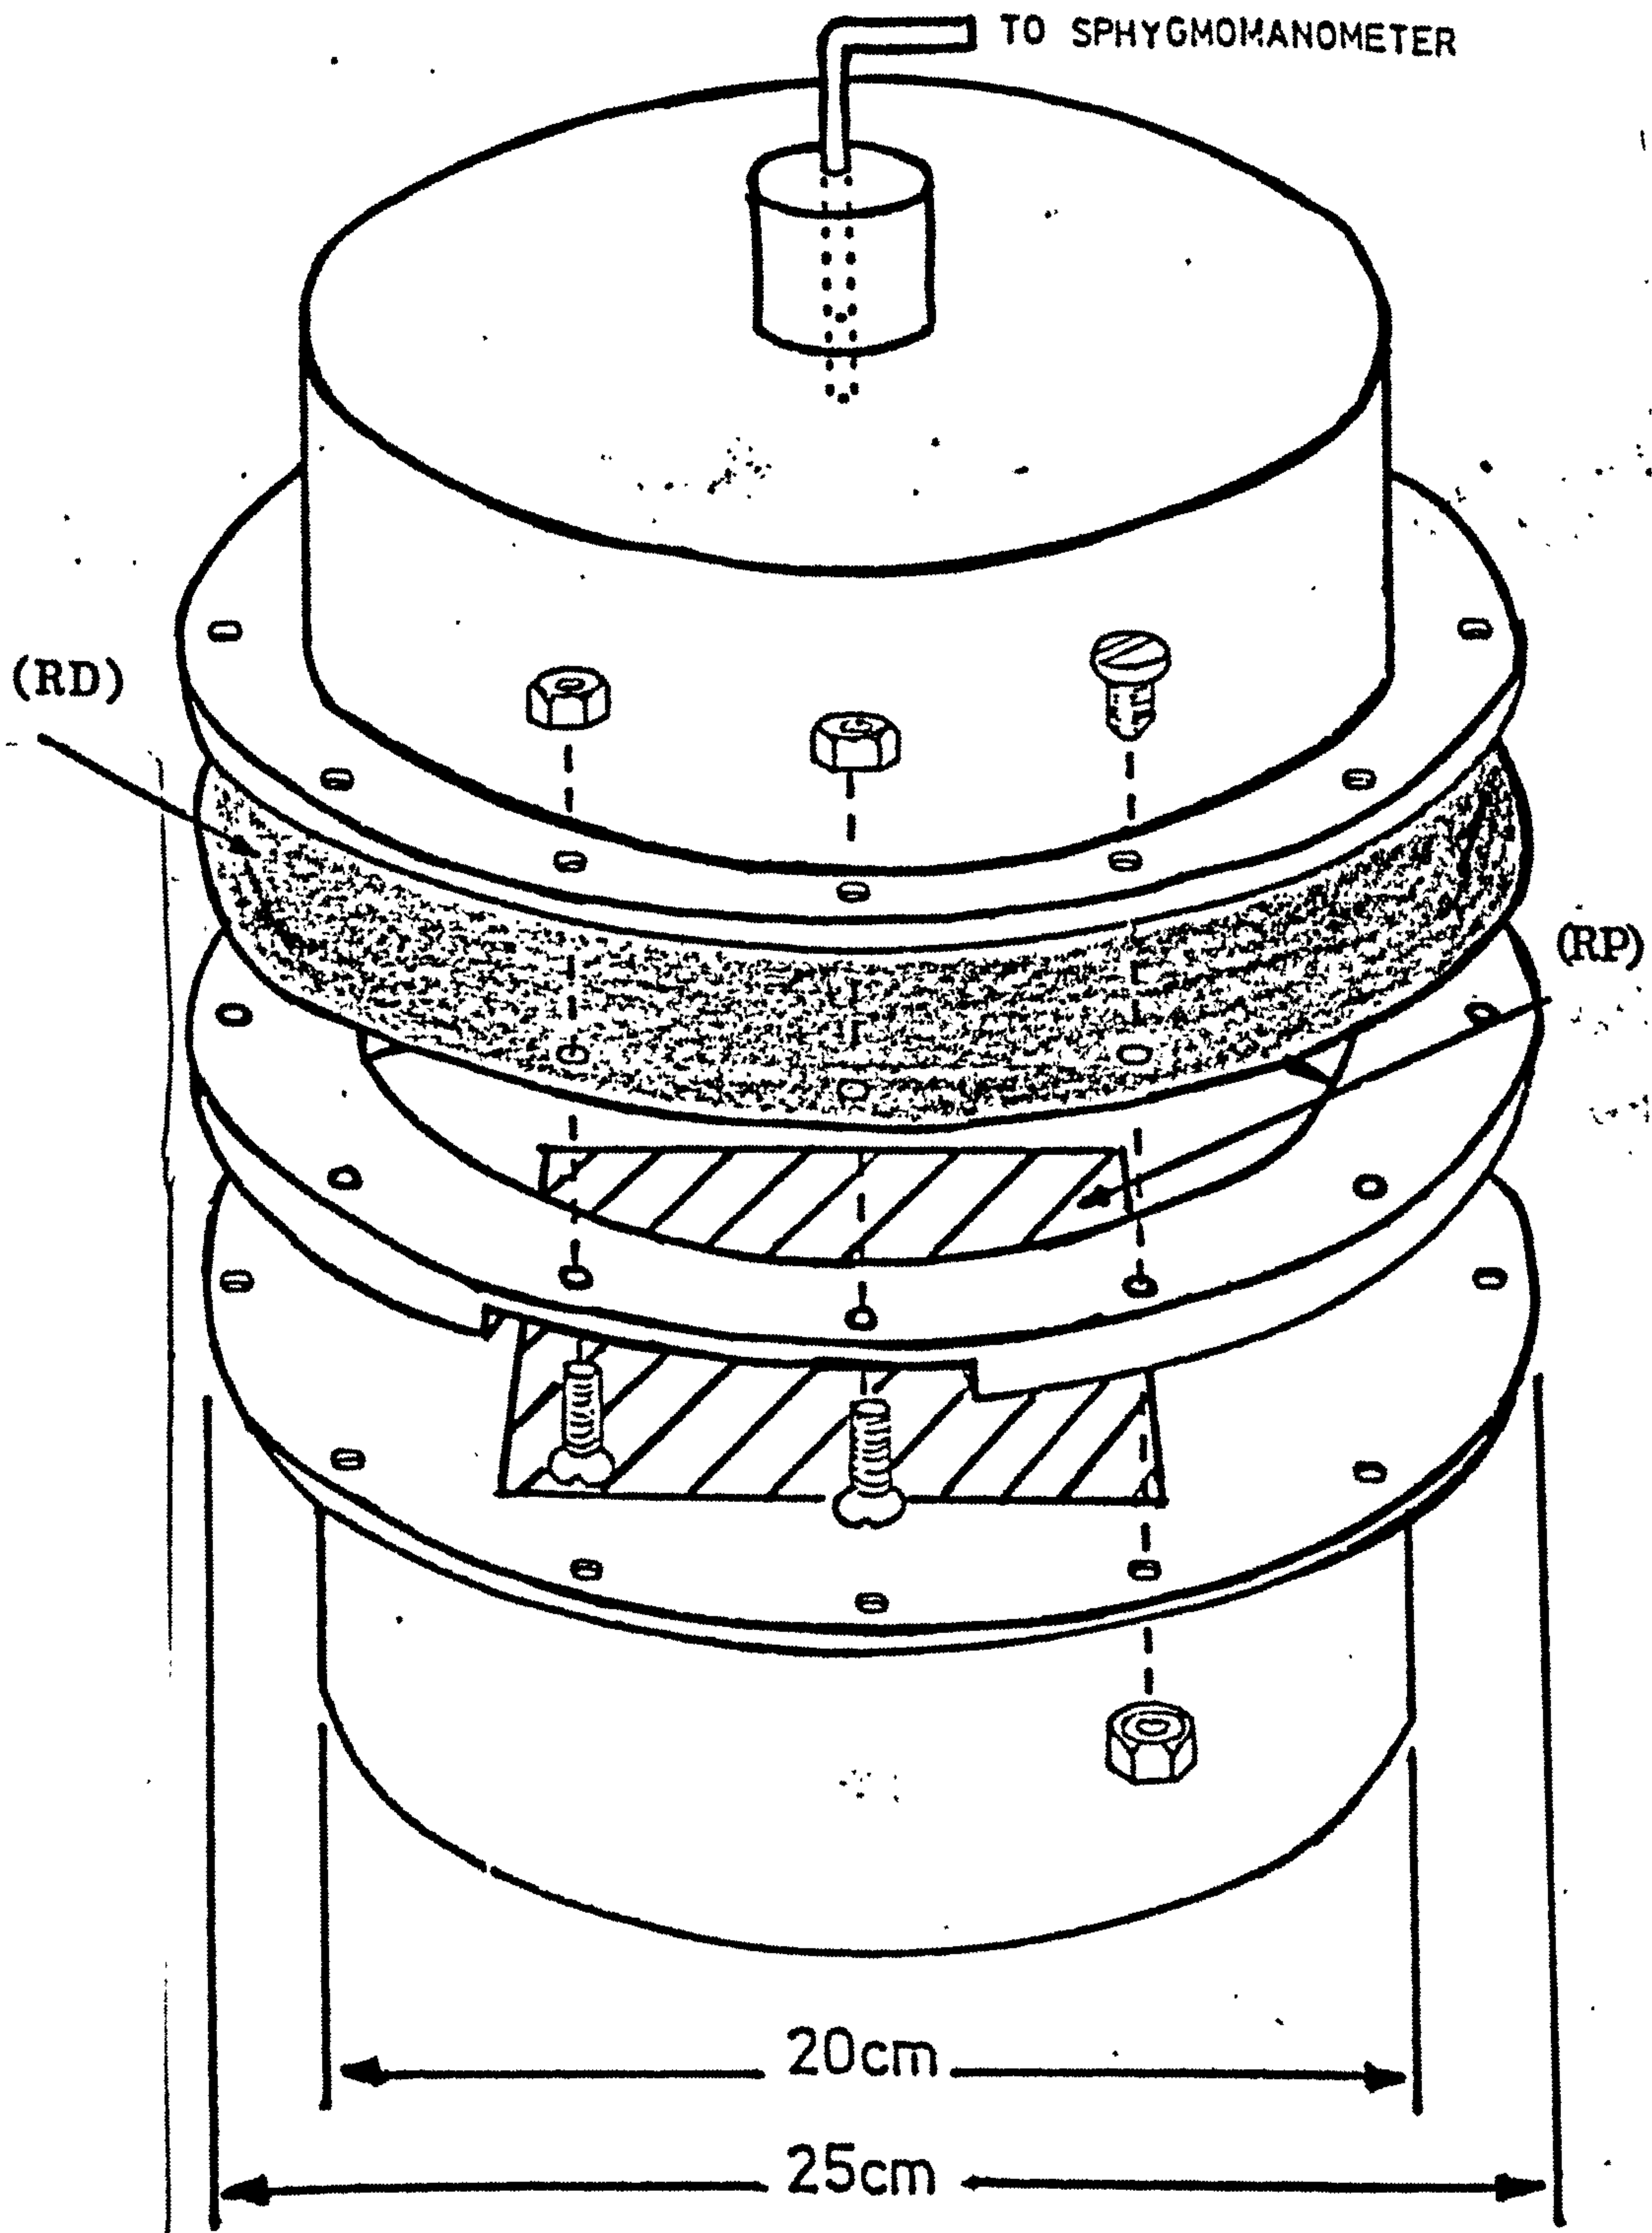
EXPLODED VIEW OF CALIBRATION CHAMBER WITH 0.25mm THICK LATEX RUBBER DIAPHRAGM (RD) AND LATEX RUBBER PAD (RP)
